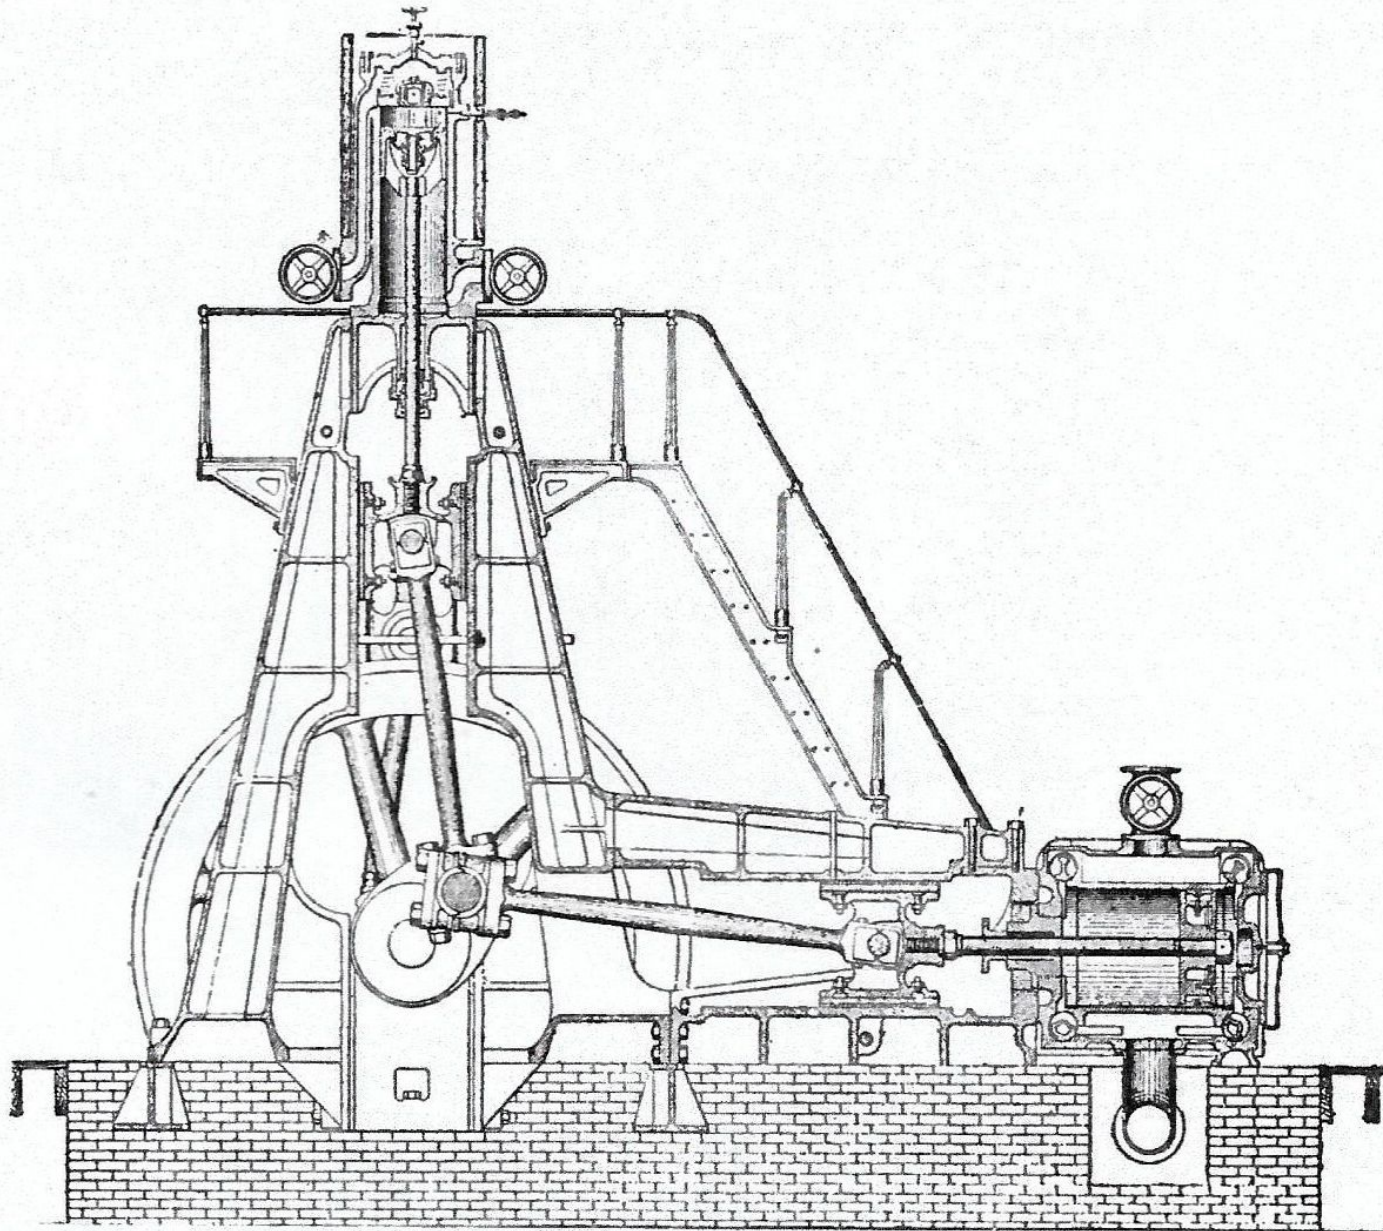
Large Single-Acting Vertical Type Frick Ammonia Compressor and Horizontal Steam Engine. Sectional Elevation of Complete Machine.
